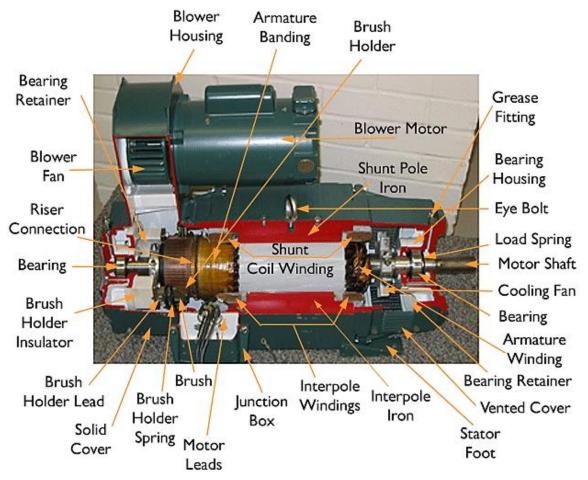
DC Motor Cutaway (Courtesy of Darby Electric Co., Inc.)
